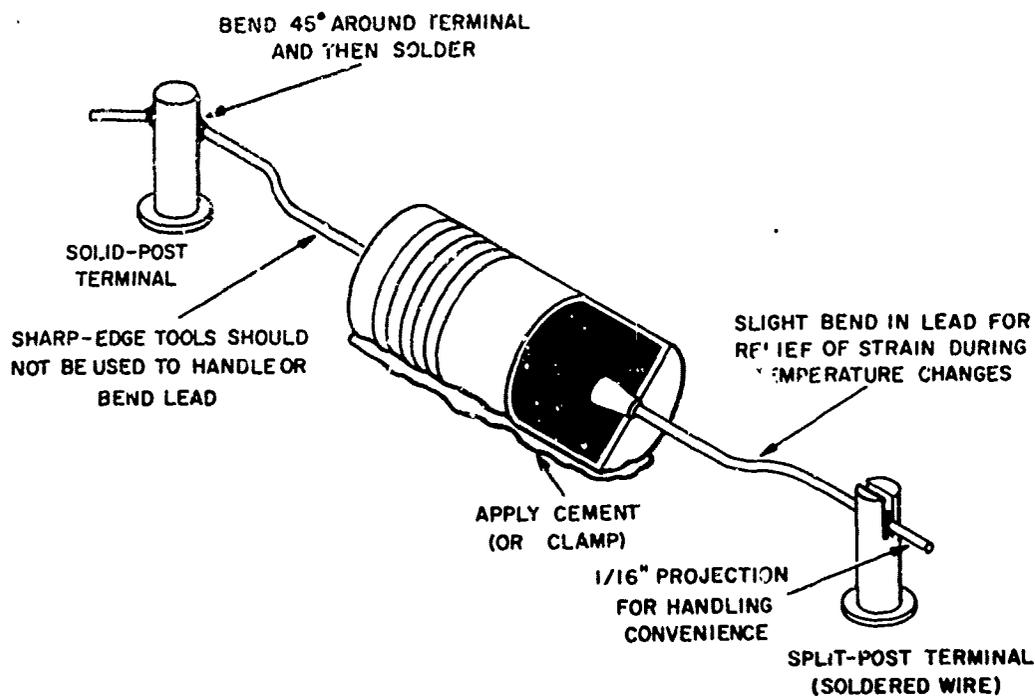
Proper Mounting Technique for Lead-Mounted Components Used in Guided Missiles
